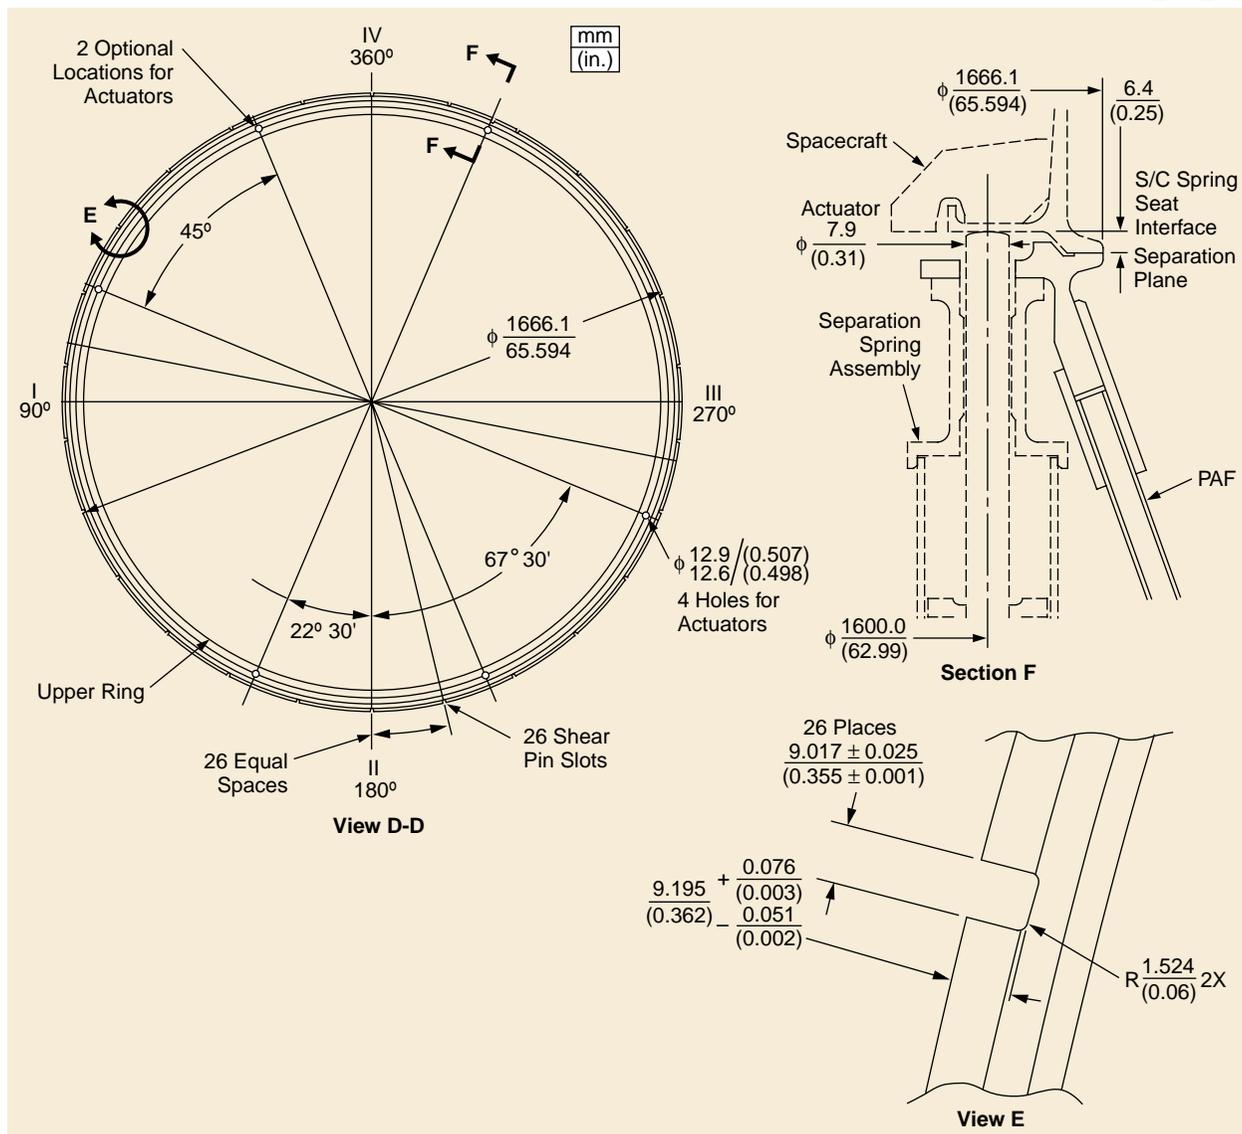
1666-4 PAF Separation Spring Assembly and Shear Slot Detail
